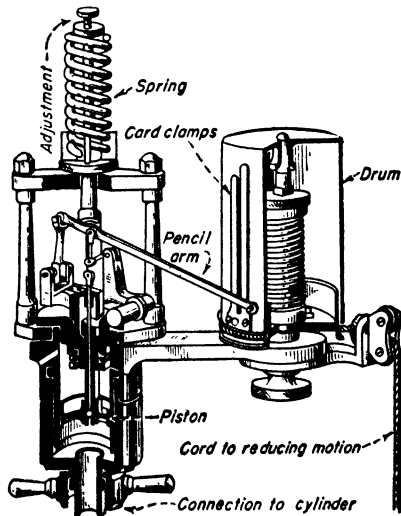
Engine indicator (spring-loaded) uses piston-gage method.
